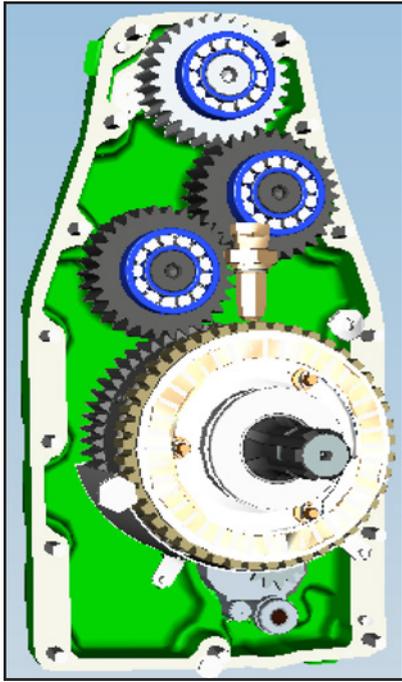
Front PTO gearbox with two idlers; the input is at the top (CCW rotation), then gears 2 and 3 and the output at the bottom.
